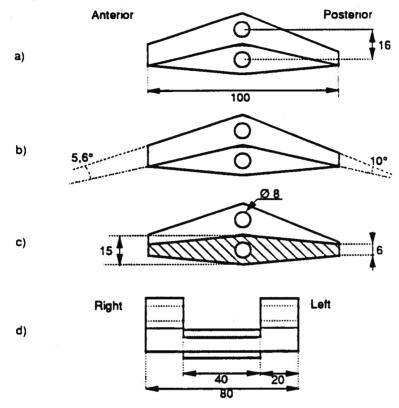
Coarse drawing of a RID-vertebra, side view (a, b), sagittal cross-section (c) and frontal view (d) (dimensions in [mm])
